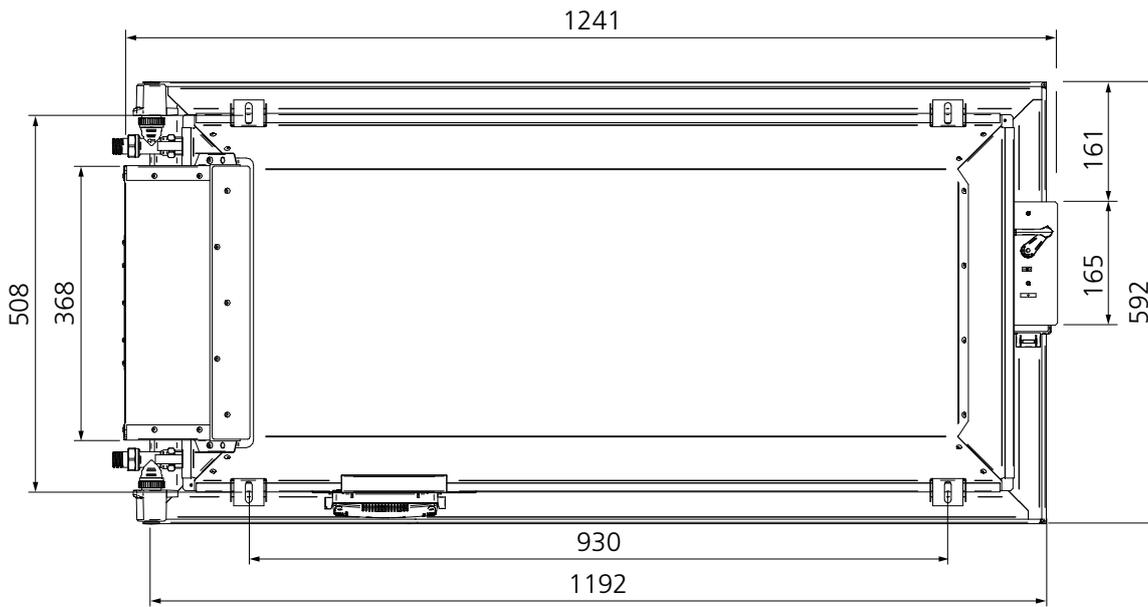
Dimensional drawing, view from above. Air connection on the short side.
